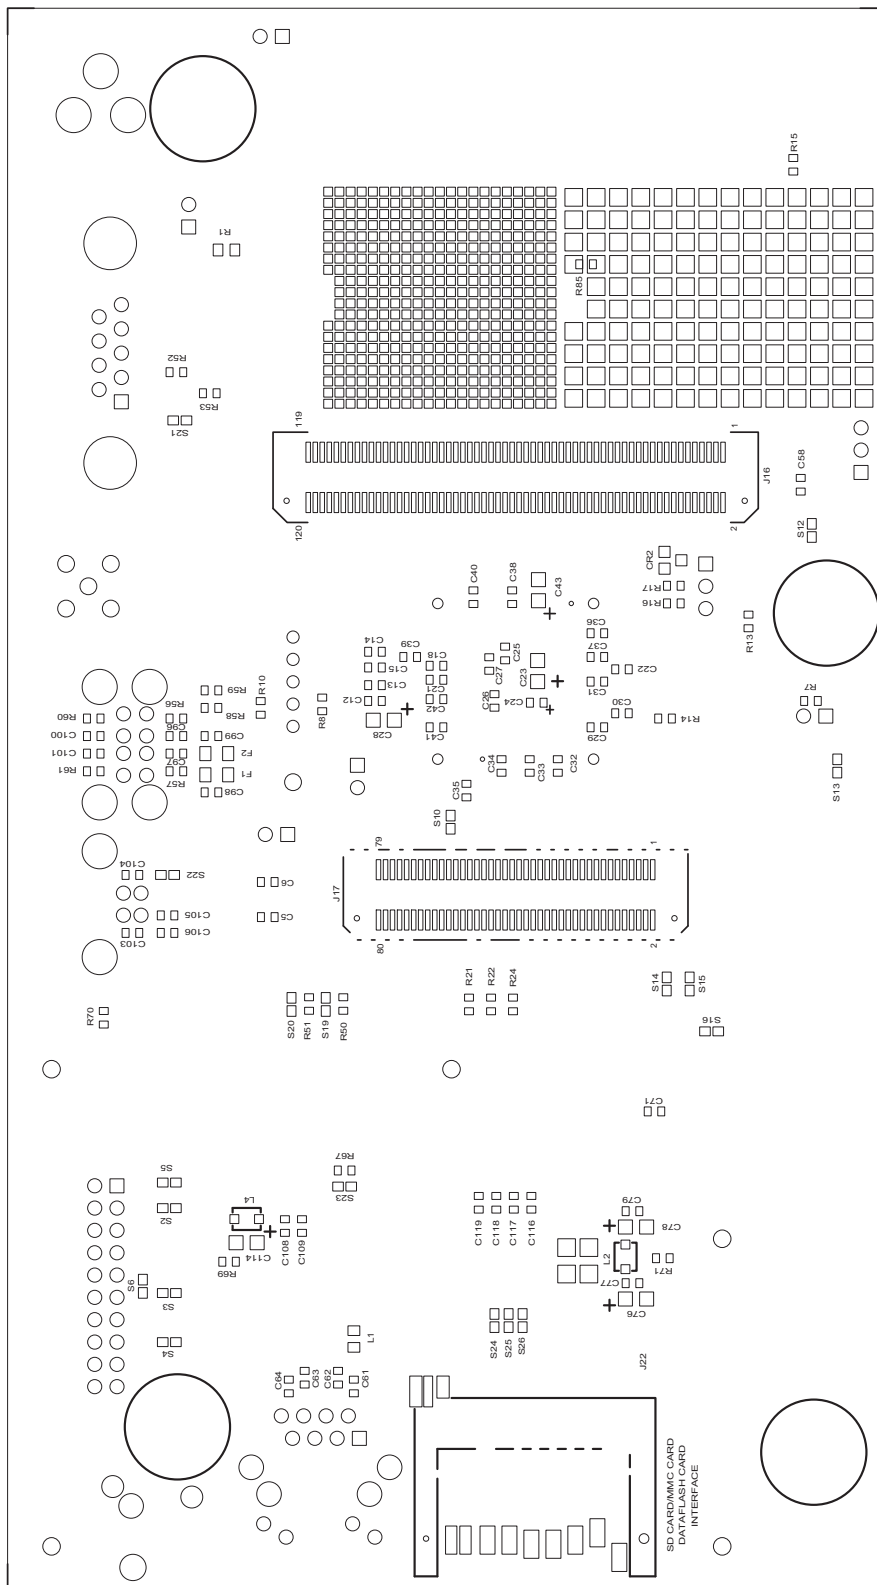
AT91SAM9G10-EK Layout - Bottom View
